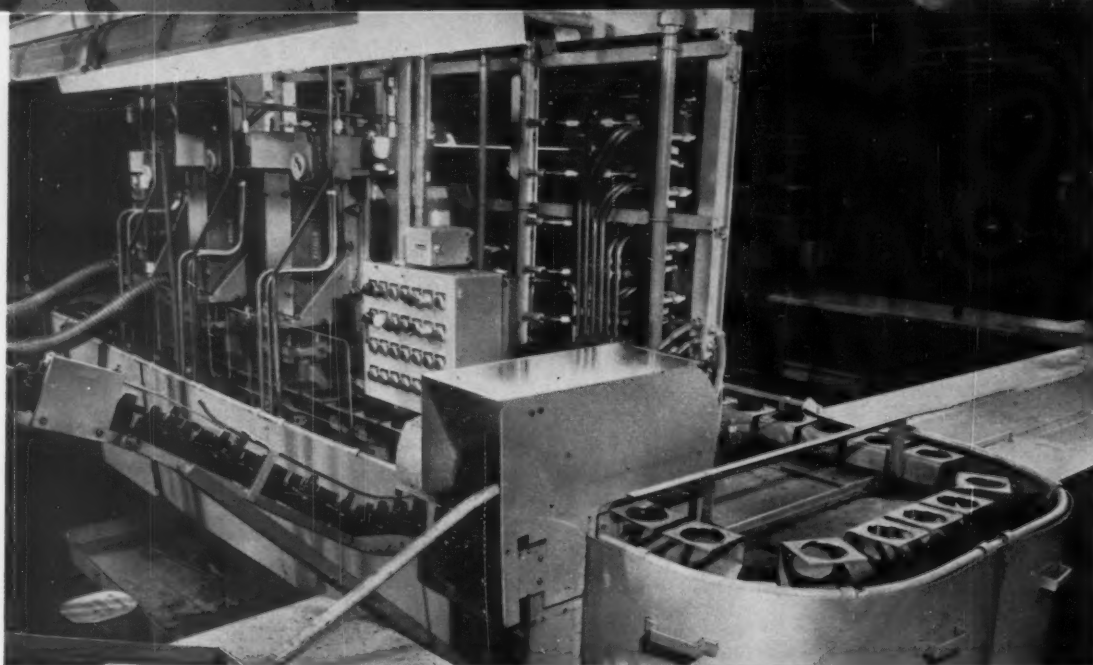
Autocycle machine for distributor terminal housings. Molded plastic housings are machined, and carbon brushes are assembled.
